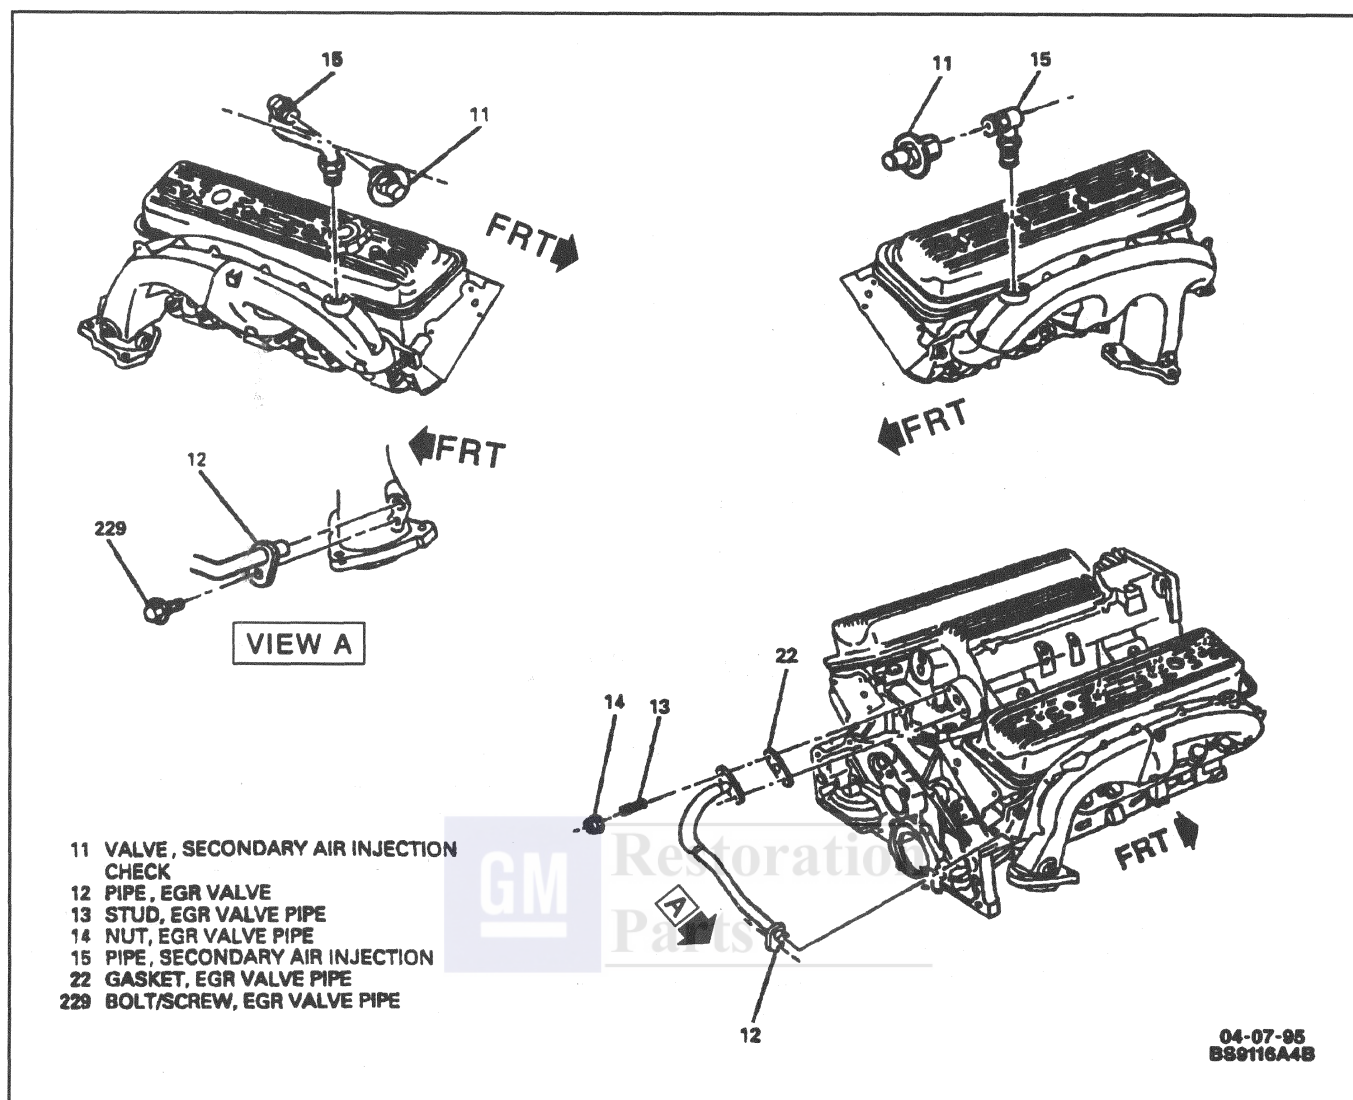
Secondary AIR Injection and EGR Valve Pipes
